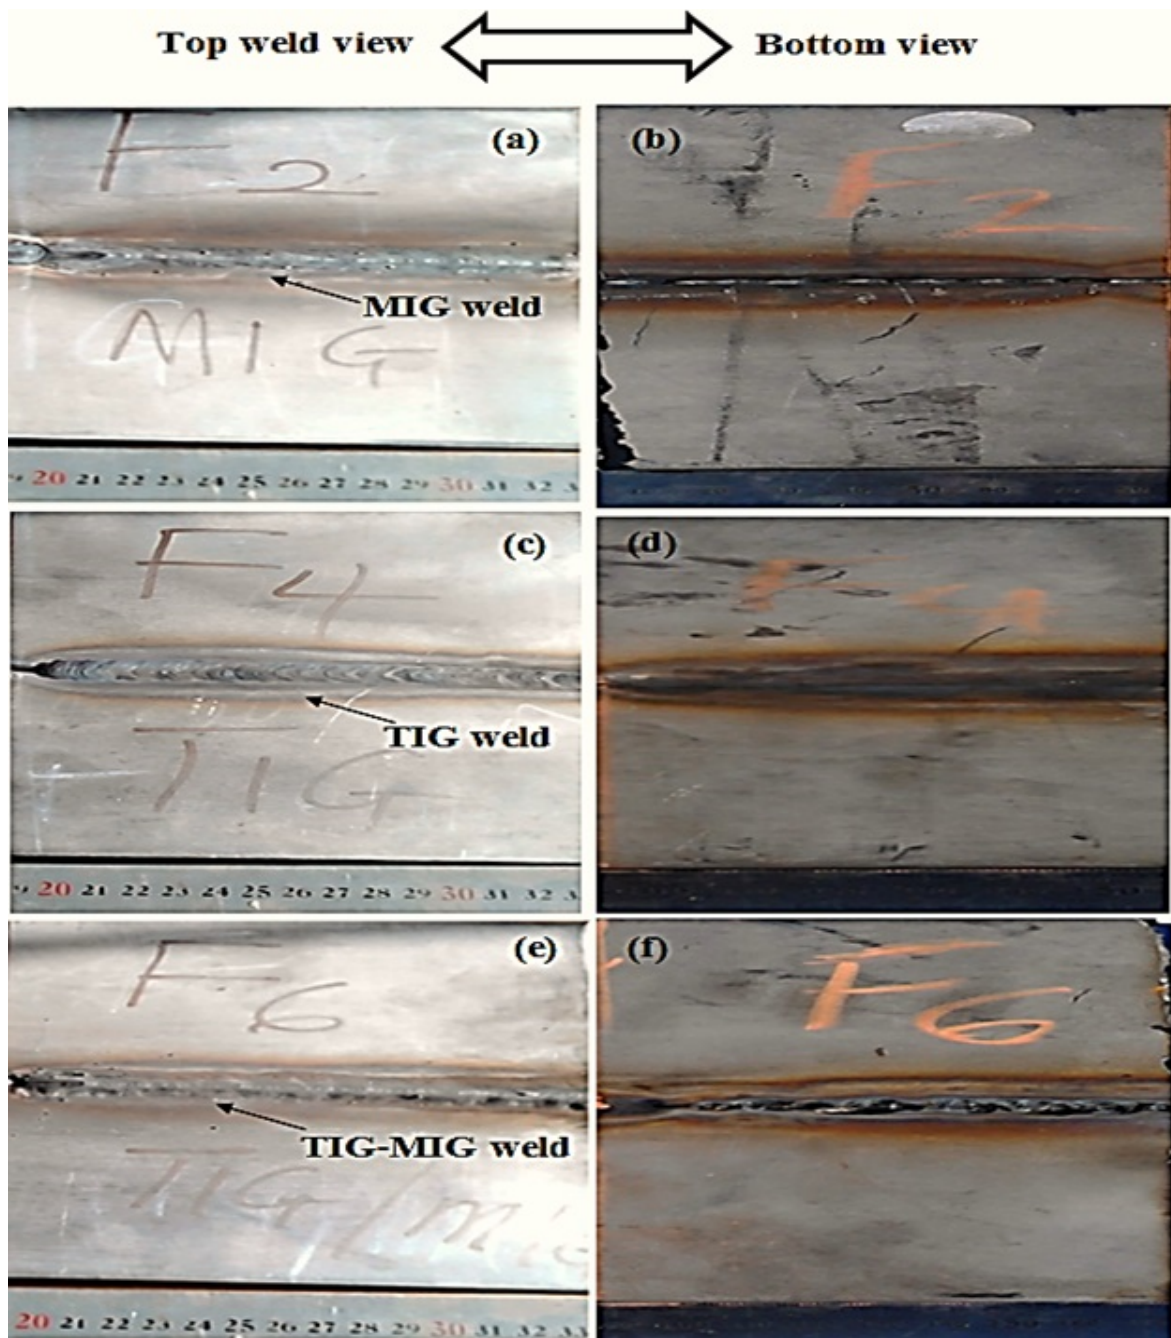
(a, b) – Top and bottom views of MIG weldment of sample F2; (c, d) – Top and bottom views of TIG weldment of sample F4; (e, f) – Top and bottom views of TIG-MIG weldment of sample F6
